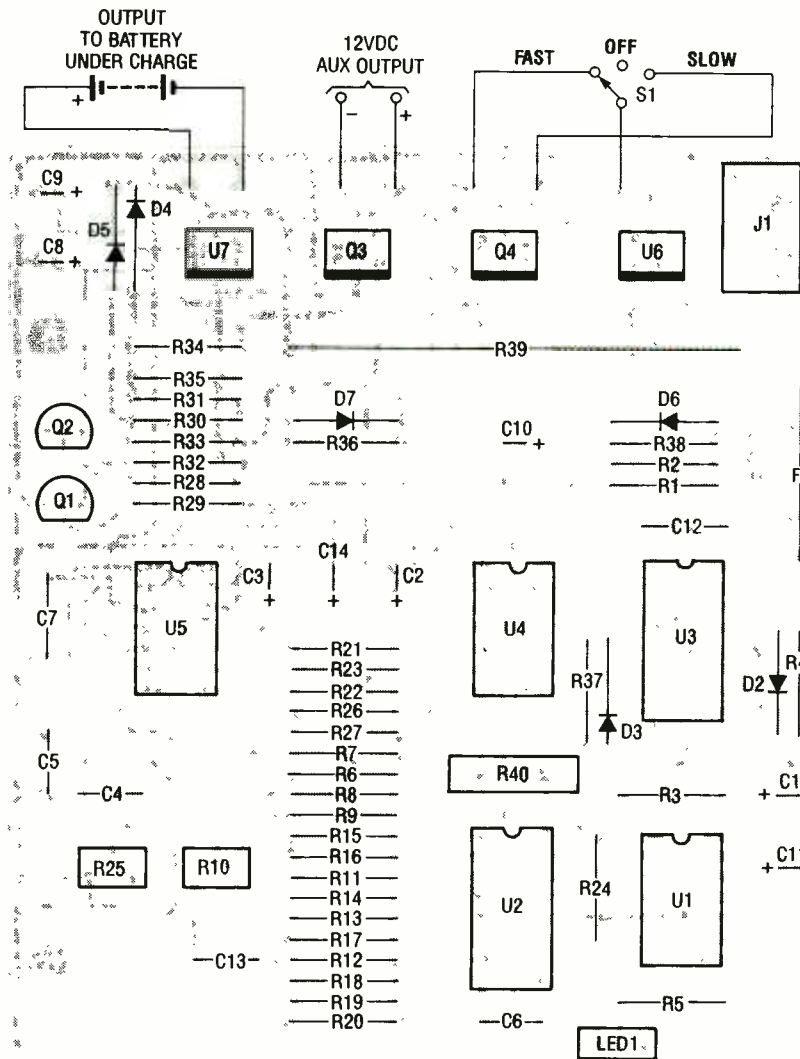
Assemble the Battery-Butler's printed-circuit board guided by this parts-placement diagram. Note that whether you purchase a board or kit from the supplier listed in the Parts List or etch your own board, it will be necessary to solder the circuit elements to both sides of the board. It is also wise to socket all of the DIP IC's, as some are CMOS devices, and as such are static sensitive.
